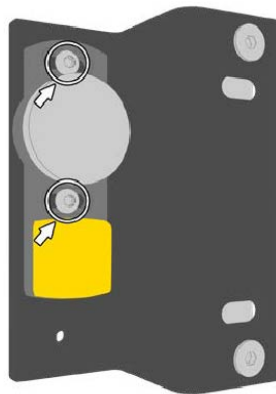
Attach the anchor plate to the mounting plate and tighten the Torx screws M6 x 8 mm.
